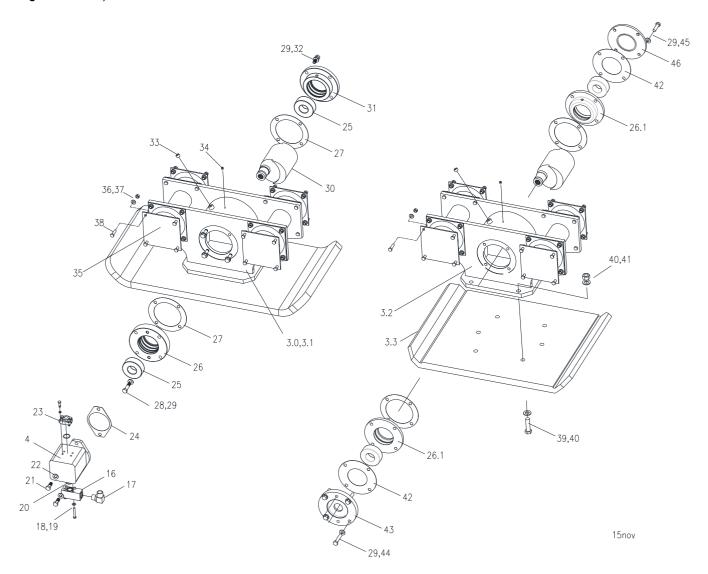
Dynamic Assembly Begin SN-1600 (Left) Dynamic Assembly End SN-1599 (Right)
